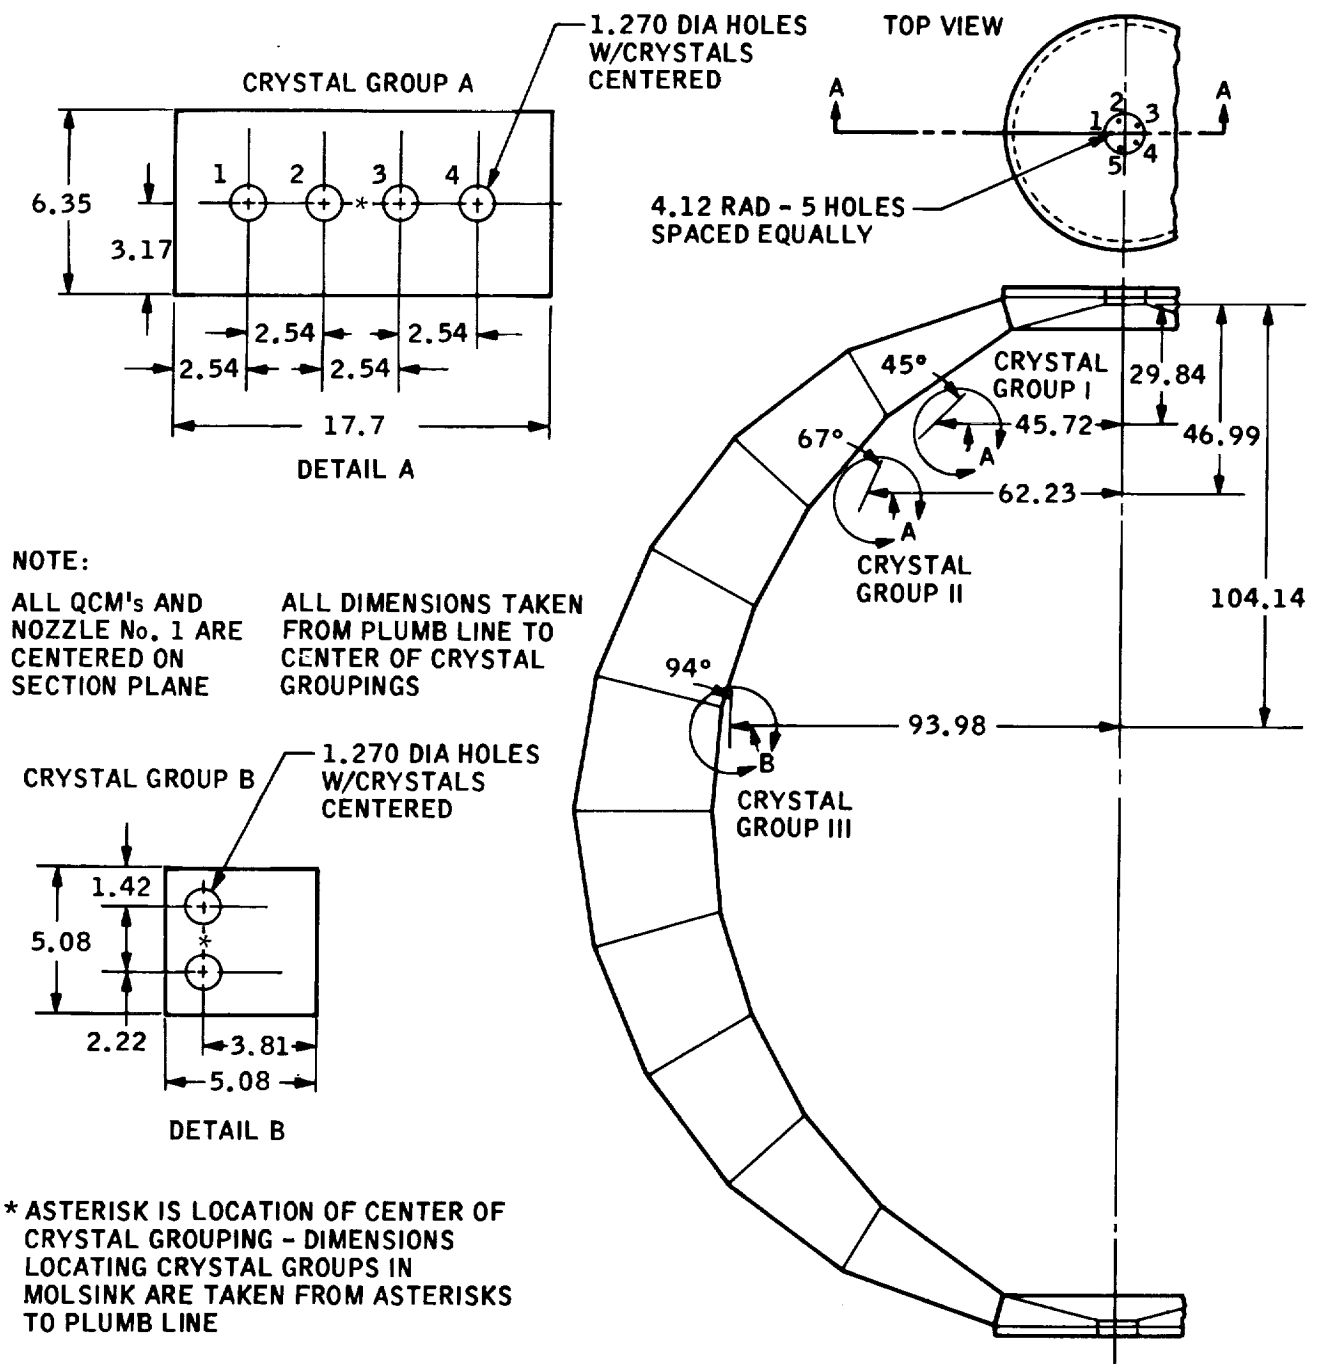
Location and position of the QCM units in the Molsink chamber (all dimensions are in cm)
